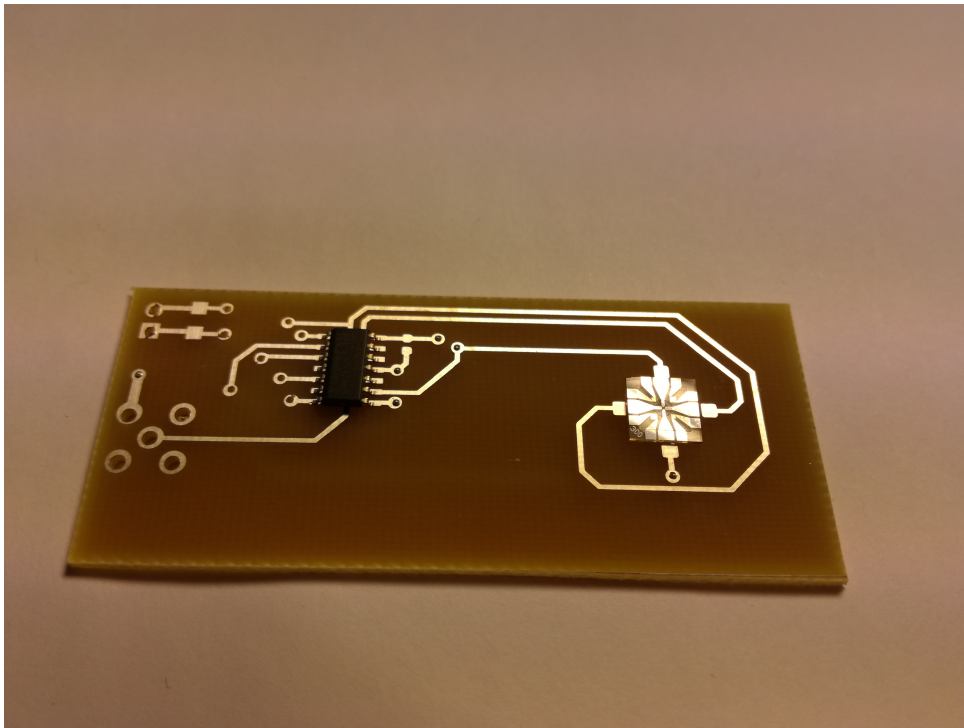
PCB top layer with fitted IC and electrode chamber at its respective placement.
